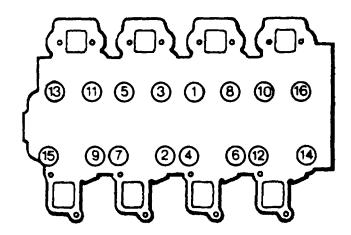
Cylinder Head Bolt Tightening Sequence
